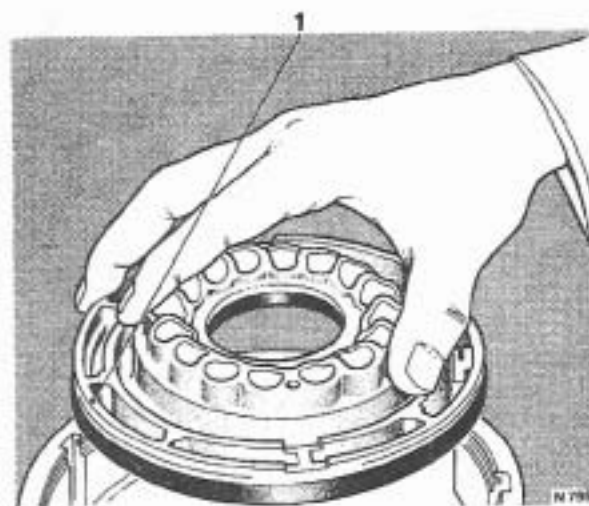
REMOVING THE FORWARD CLUTCH PISTON
